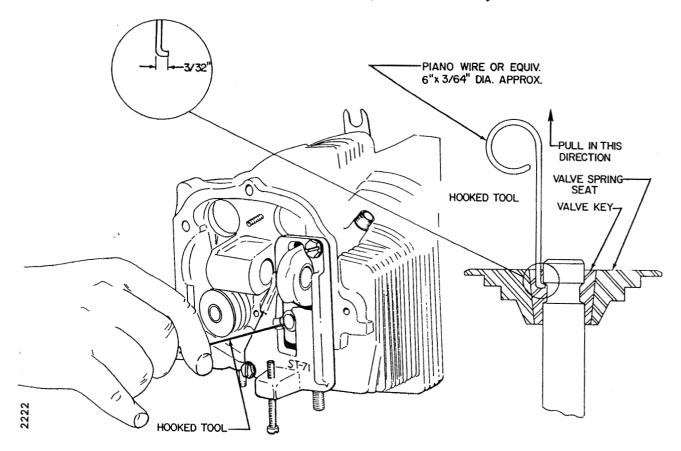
Method of Using Hooked Wire Tool to Pull Valve Into Position For Removal of Tapered Keys
